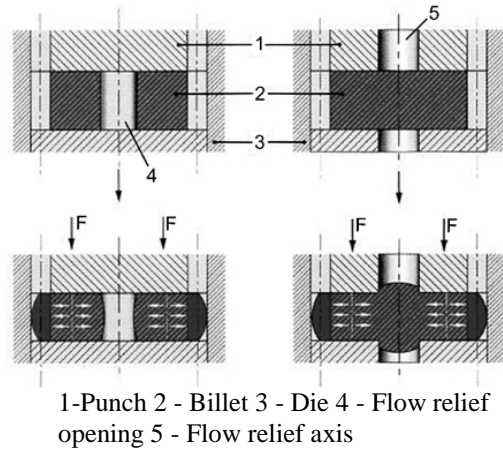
Application of FRO and FRA in extrusion of gear [5]
